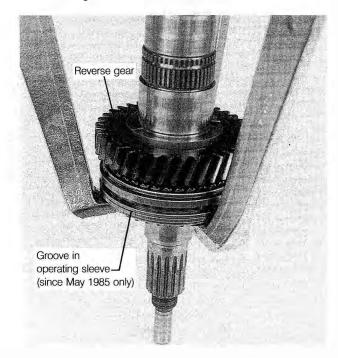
Reverse gear assembly being installed on output shaft.
